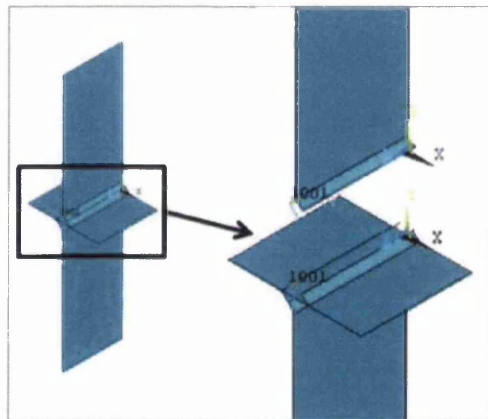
Load-bearing cruciform coupon - FE shell element model crack plane 10mm weld leg
